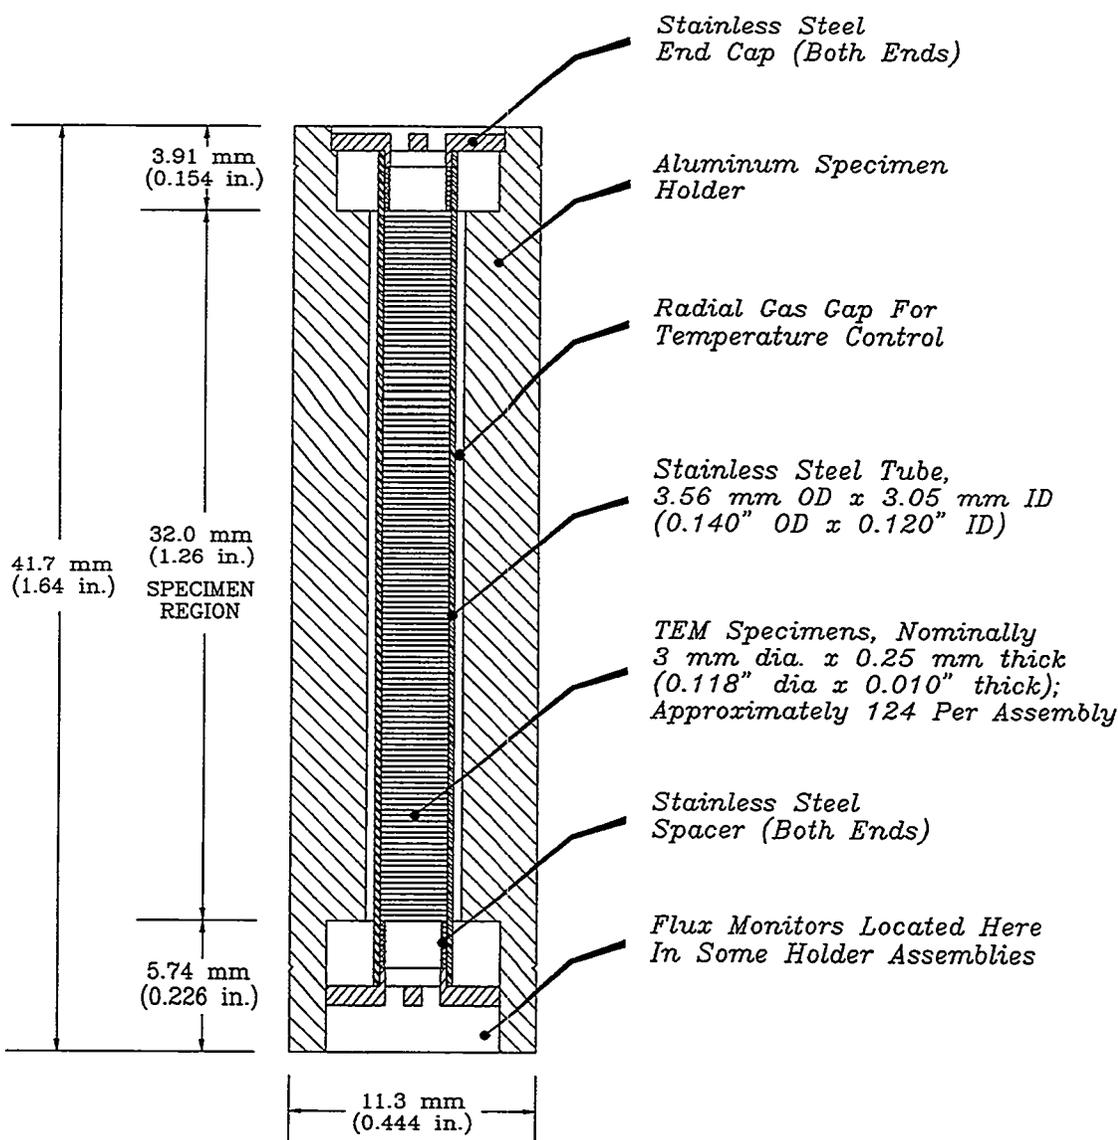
Cross-section of Typical TEM Specimen Holder Assembly
